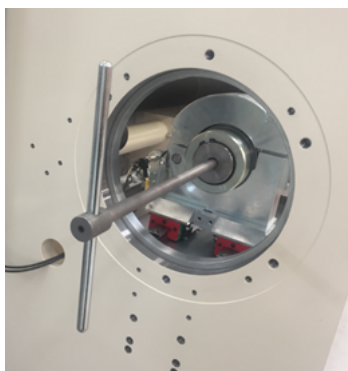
Expanding a mechanical reel shaft within a roll
